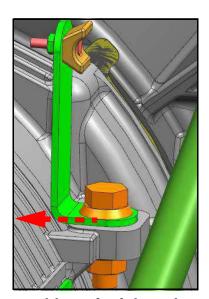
Push the bracket assembly as far inboard as possible to achieve clearance.
